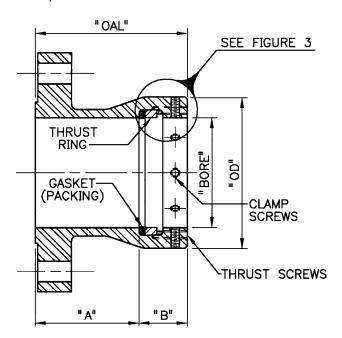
Typical PLIDCO®+FLANGE Cross Section NOTE: (See Table 1 for dimensional data)
